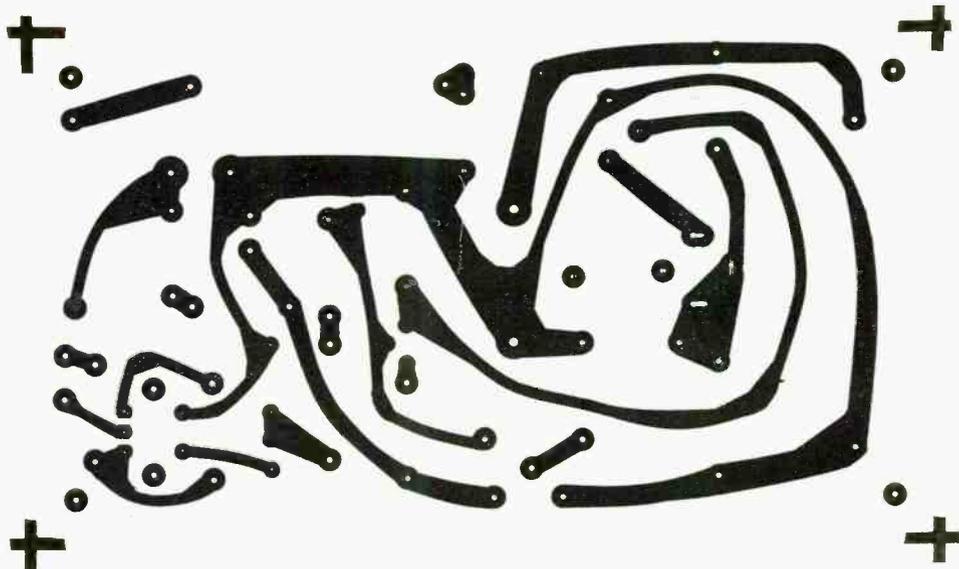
Actual-size printed circuit board. You can make the board yourself or purchase it (see Parts List). If you make your own board, drill the holes as shown.
